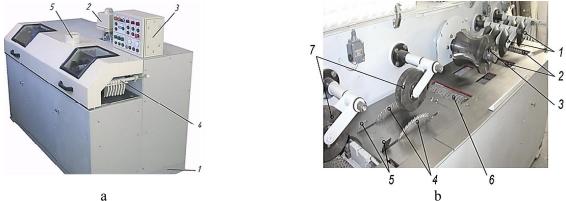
General view (a) and a working area (b) of the machine tool for machining raw waste lumber.
